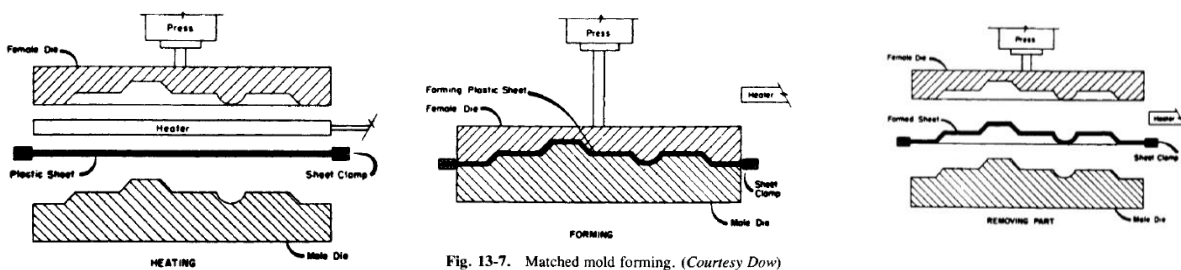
Matched mold forming. (Courtesy Dow)
